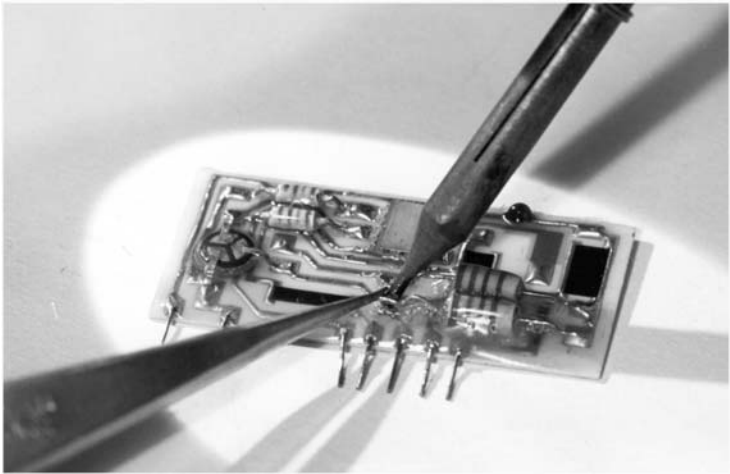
Rework using a hot solder iron to melt through polyurethane coating.
